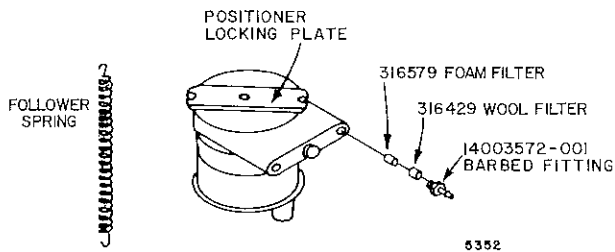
Positive Positioner Gradutrol Relay Assembly No. 313555A-E. The Follower Spring, Shown Above, Is Included with 313555B and D.
